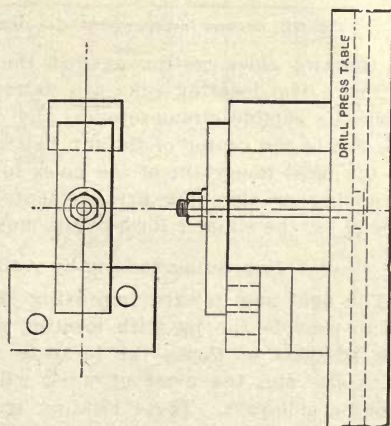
Holding Jig and Work on Drill Press Table. Two Pieces Drilled at Once
